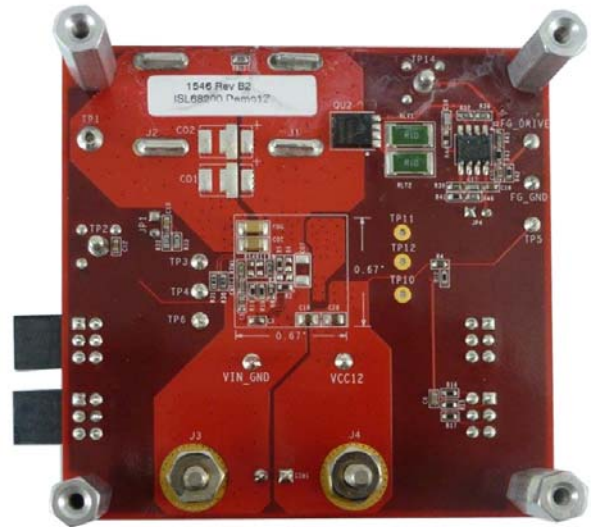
DEMONSTRATION BOARD BOTTOM VIEW
